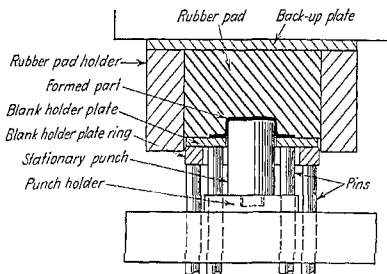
Schematic view of deep drawing by the rubber-pad process.²
